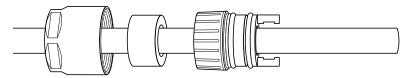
Cable with backshell nut, rubber seal, and clamping ring
